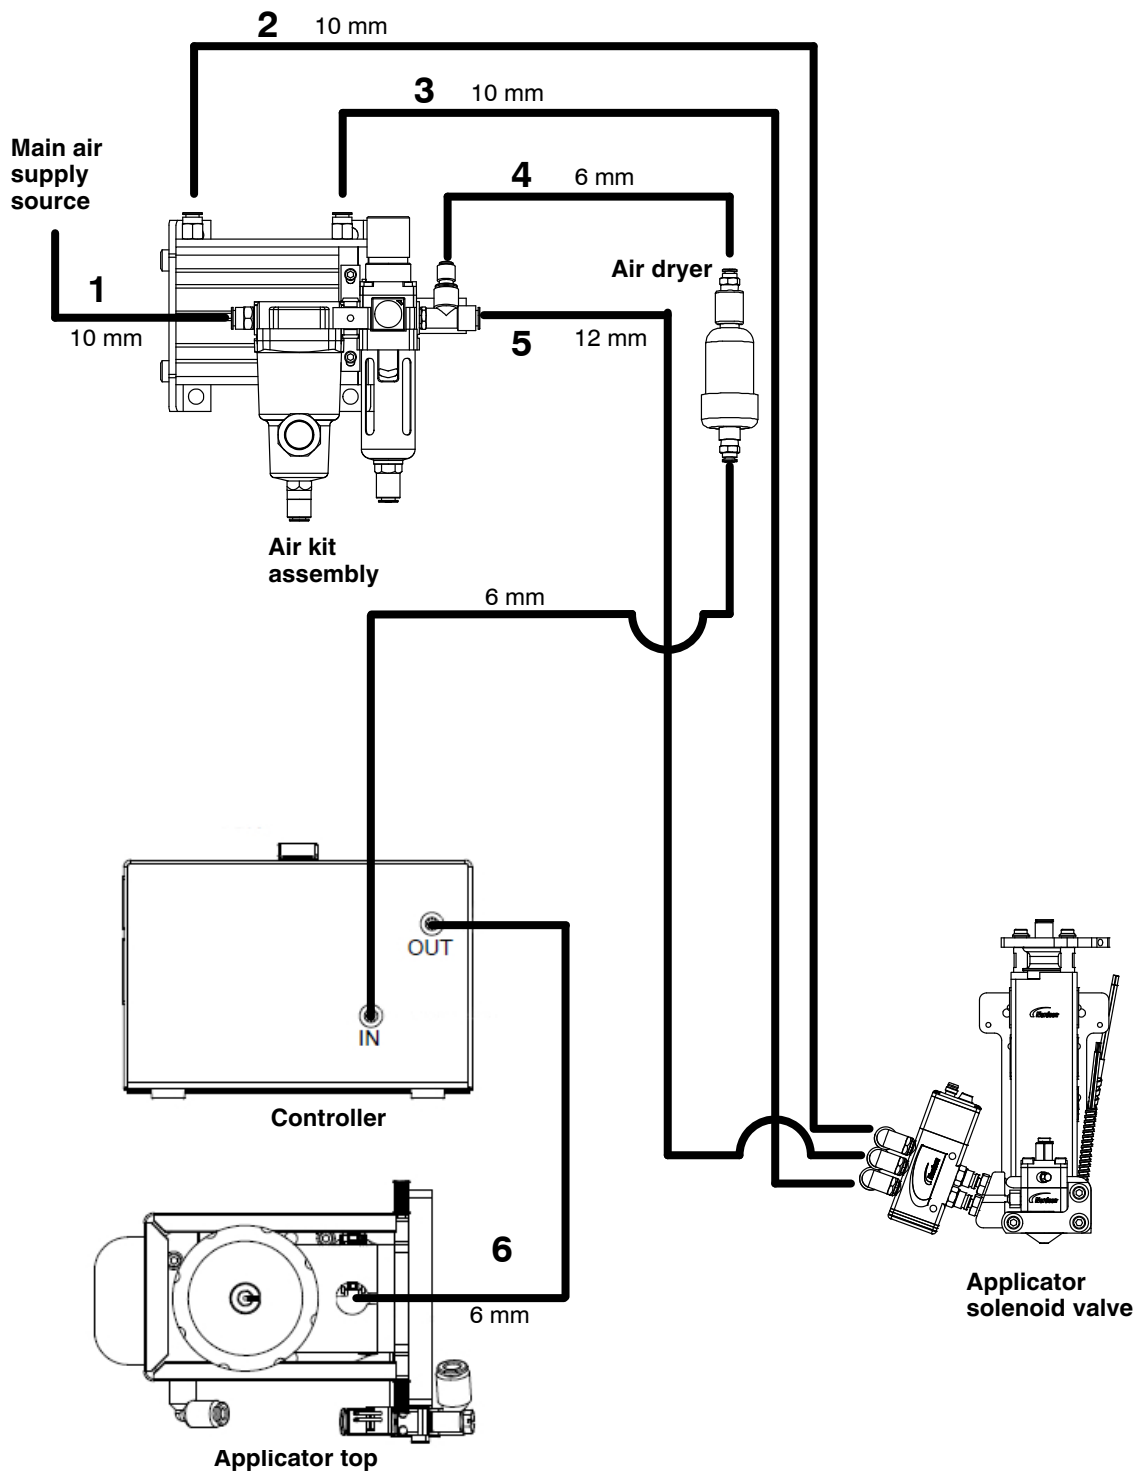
Air supply connections – PURJet 30XT (refer to Table 3)
